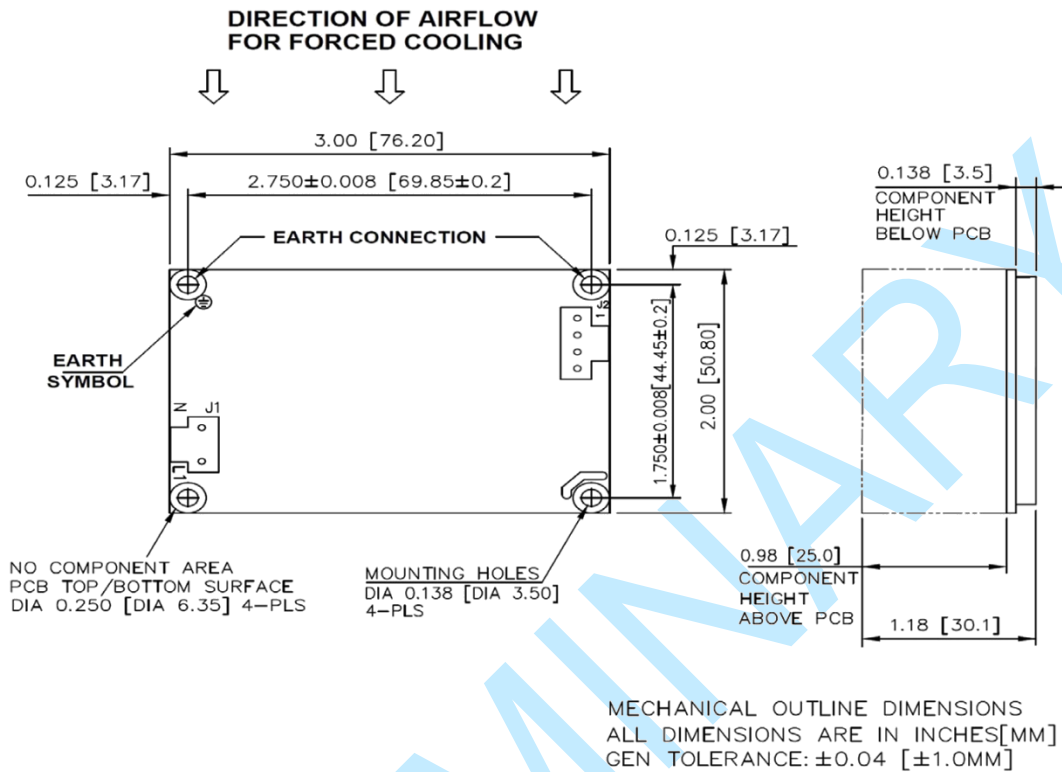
Mechanical Drawing - Screw Terminal (Option 1)
